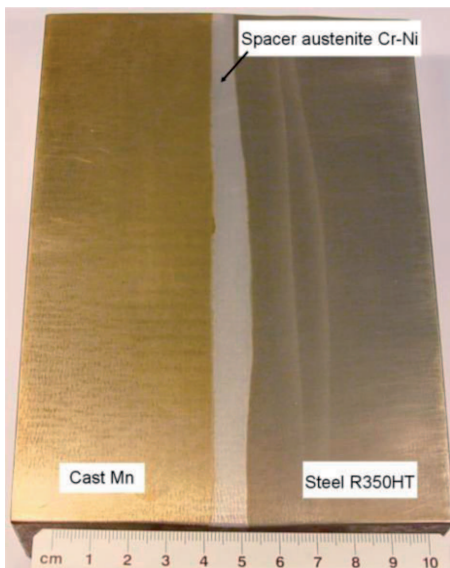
Image of a longitudinal section of a high-manganese cast steel joint welded with R350HT steel with the correct plate width
